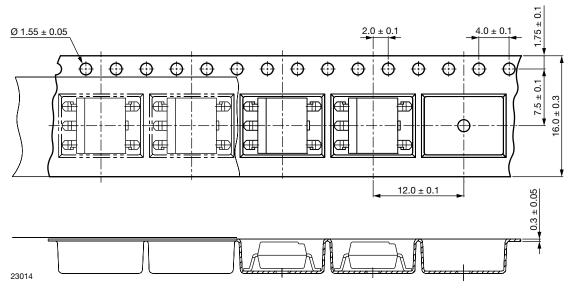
Tape and Reel Packaging (1000 pieces on reel)
